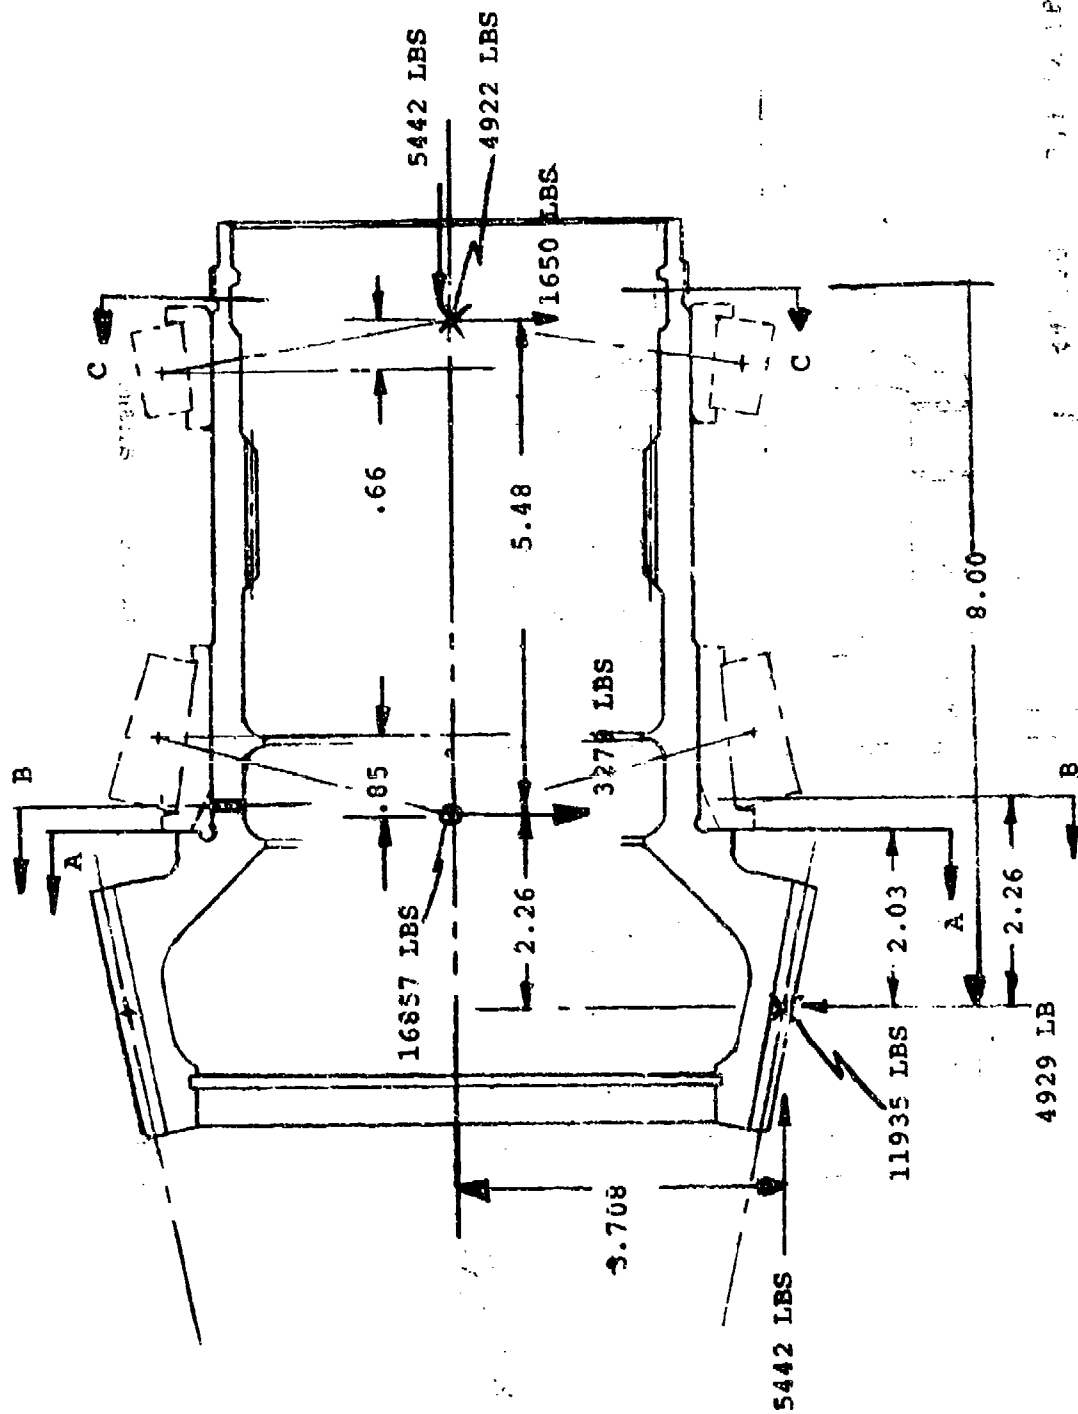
Gear Spiral Bevel Slant Shaft, Combiner Transmission.
